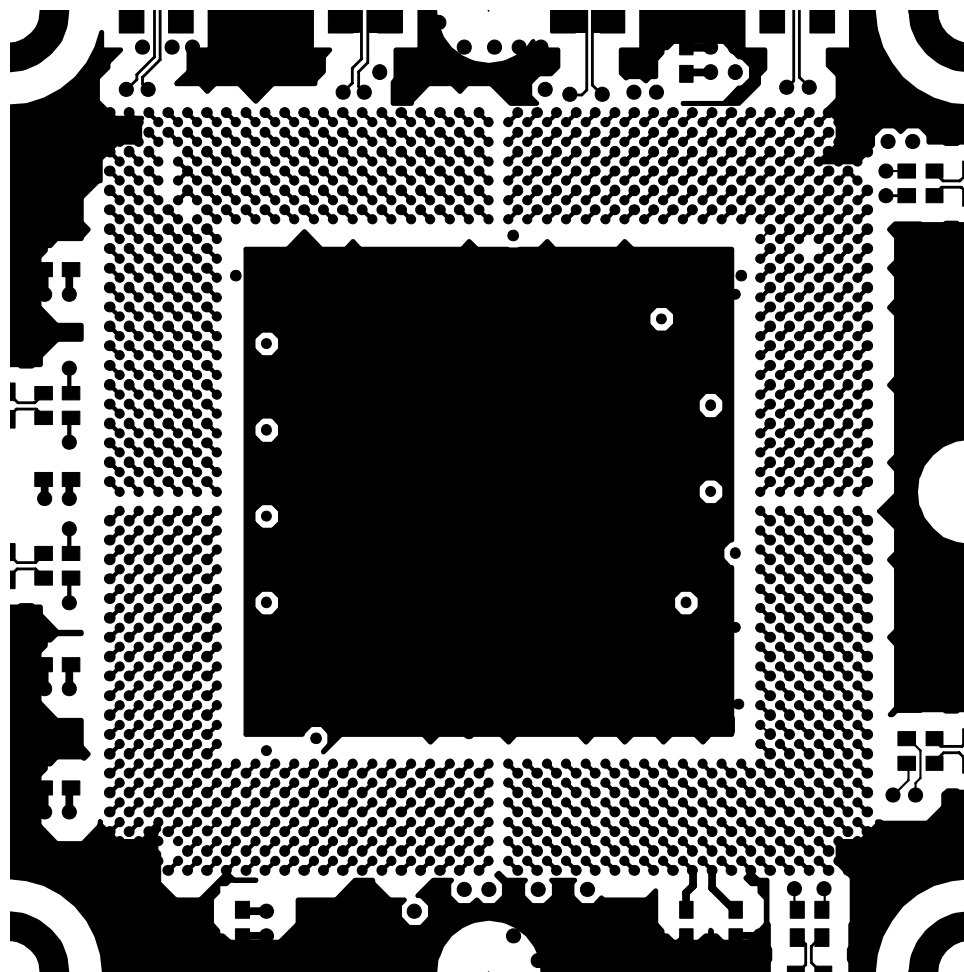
OCX256 BGA Signal Breakout (inner chip via's removed for clarity)
